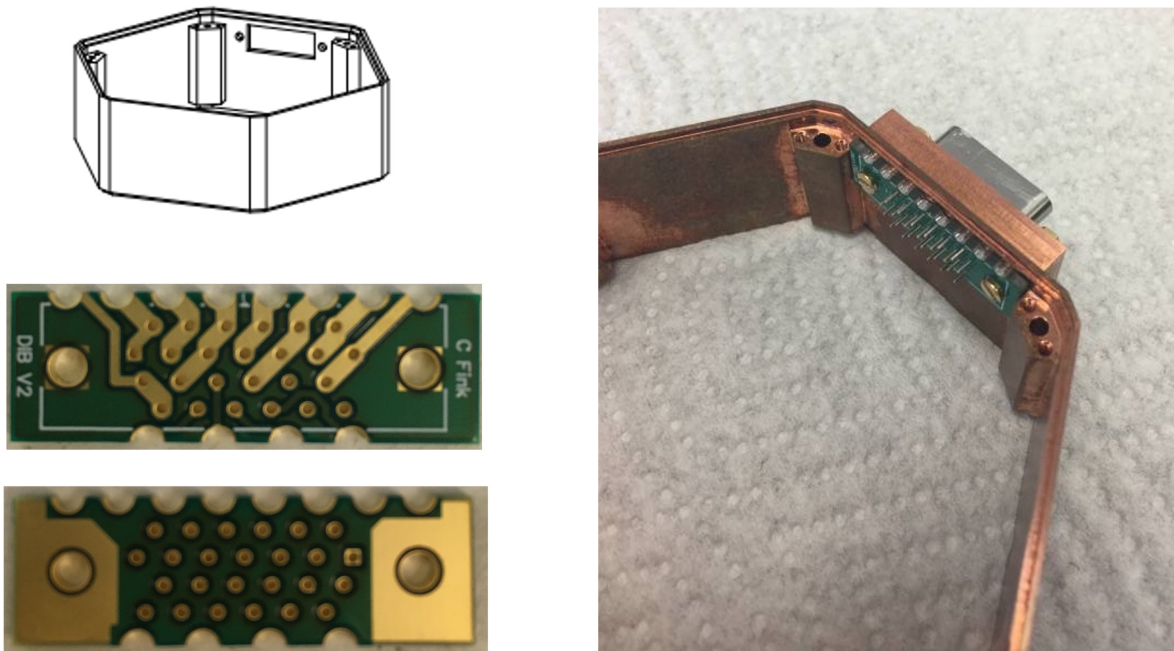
Clockwise from top: Schematic of housing, DIB mounted in housing with micro-D in place, back side of DIB, front side of DIB.
